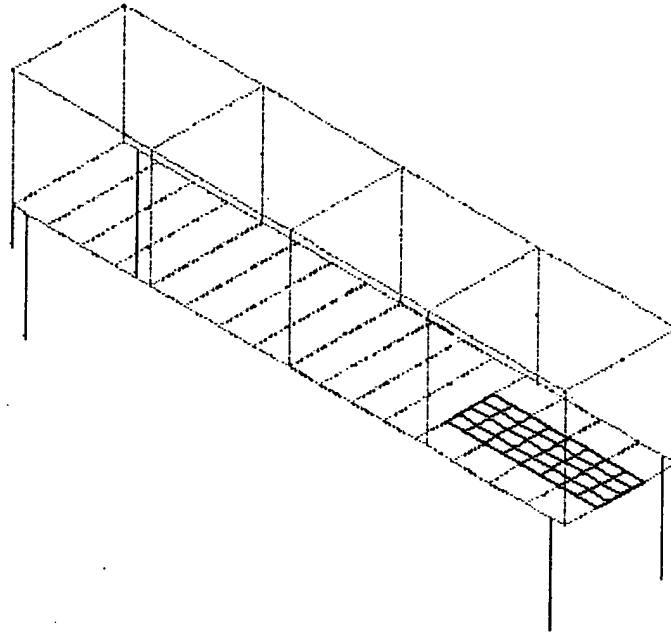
A/B: The weight load and the centralized load at the floor longitude beam corners (40 foot and 40 foot high cube collapsible container)
